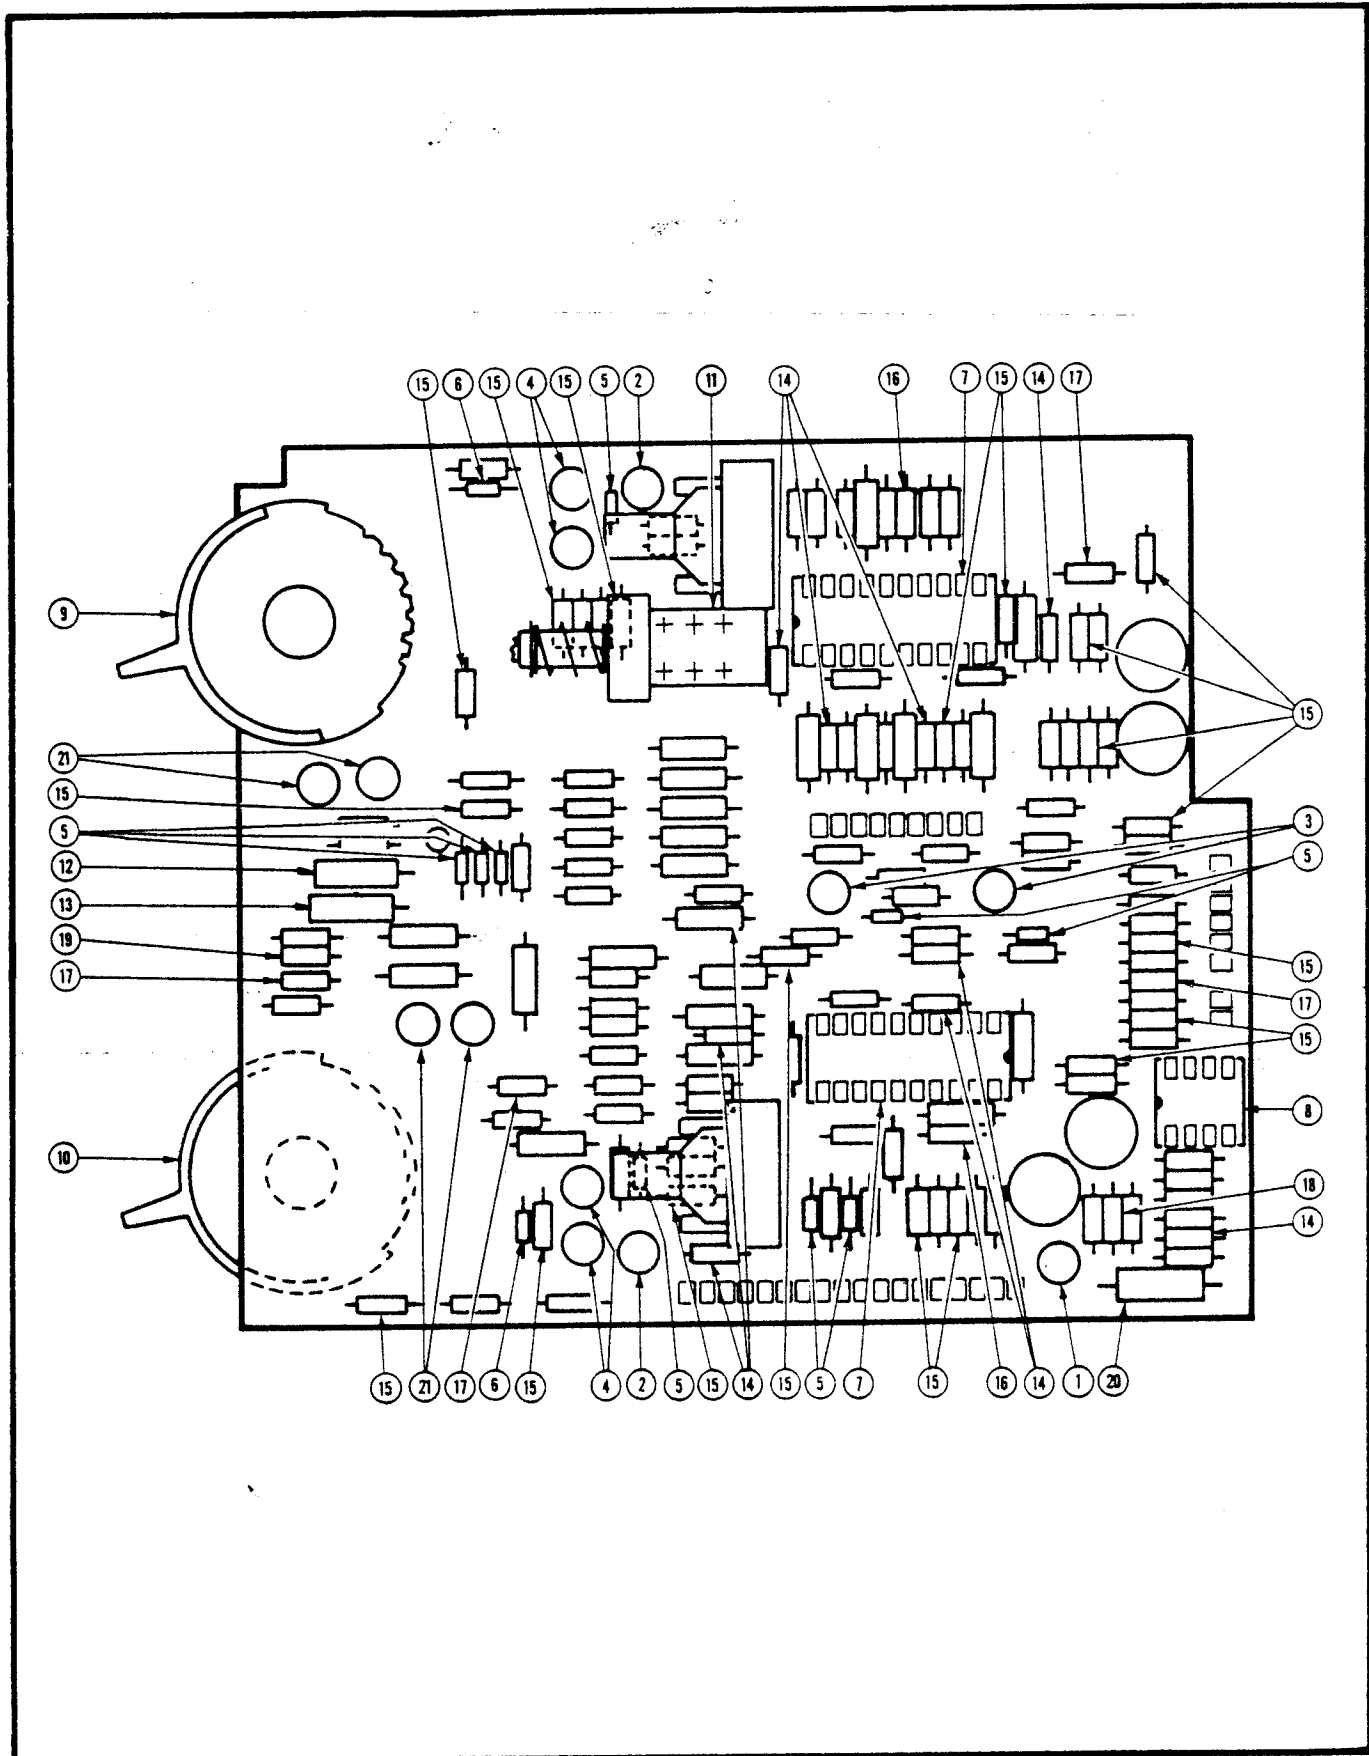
A7 Circuit Board Assembly, Trigger (sheet 1 of 3).
